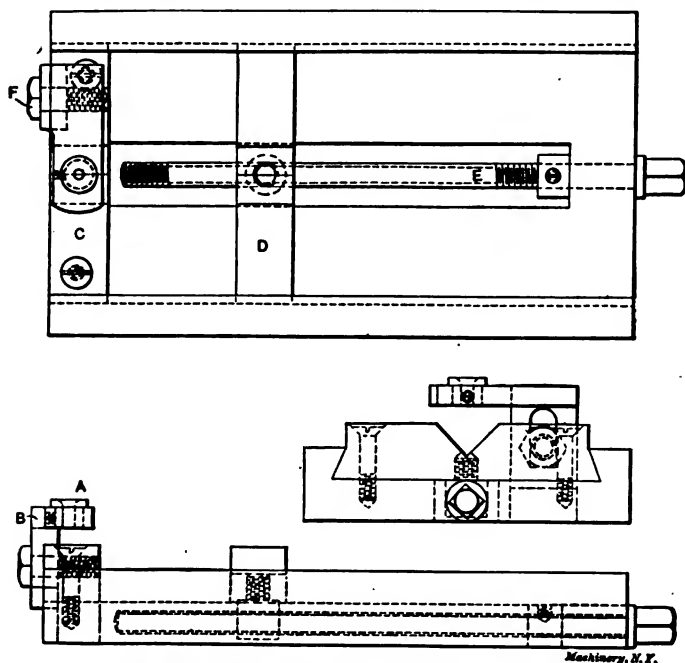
Jig for Drilling Holes in Studs and Shafts
